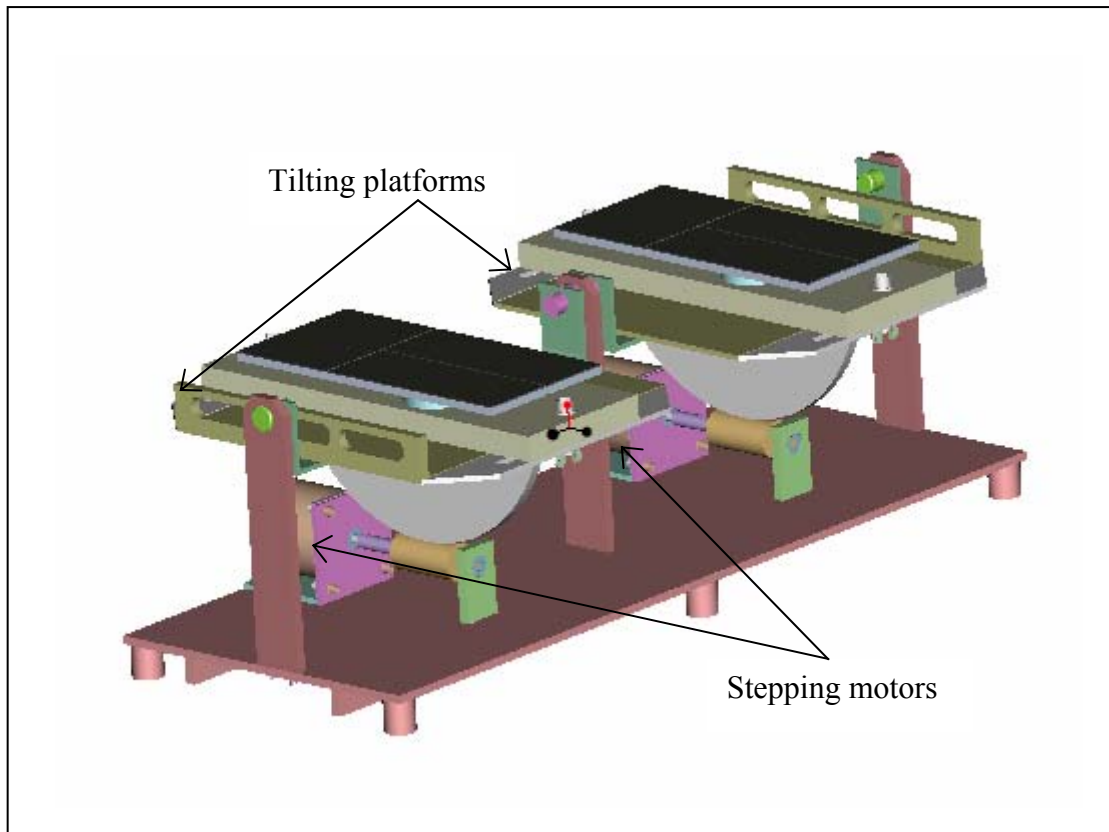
Worm gear concept: using stepping motors to drive the platforms
